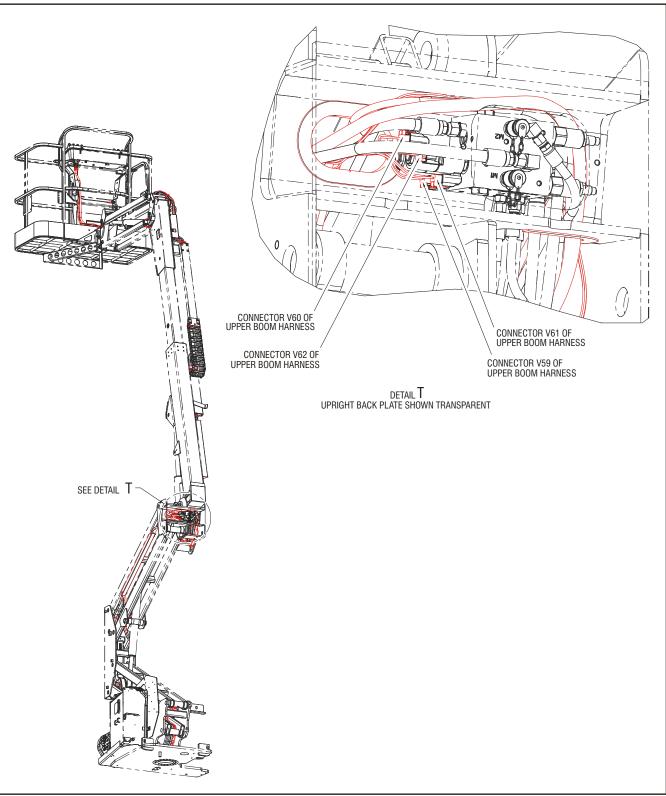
Cable Installation and Identification - Sheet 7 of 8
